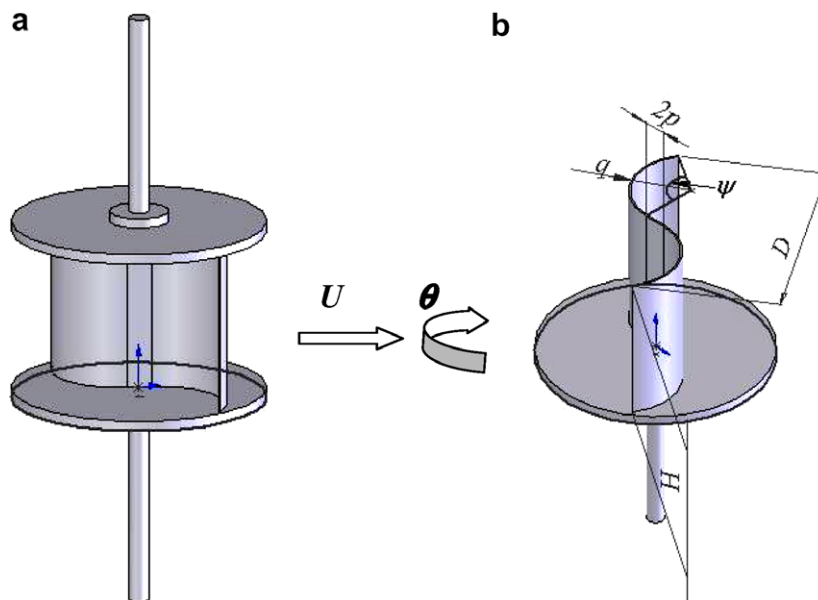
(a) Modified Savonius rotor without shaft in between the end plates (present study) and (b) Geometrical parameters of modified Savonius rotor.
